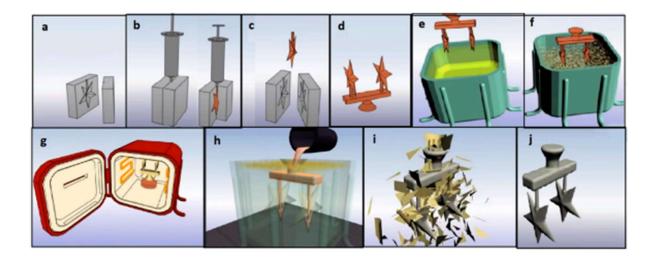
Schematic Illustration of investment casting (IC) process: (a) Metal mold prepared for wax injection; (b) Wax pattern making by injection; (c) Wax ejected from the mold; (d) Wax patterns assembled in a tree; (e) Coating with ceramic slurry; (f) Stucco Coating; (g) Dewaxing through heating; (h) Metal Pouring; (i) Destroying ceramic shell; (j) Casted part ready to be cut off from the assembly. [1]
